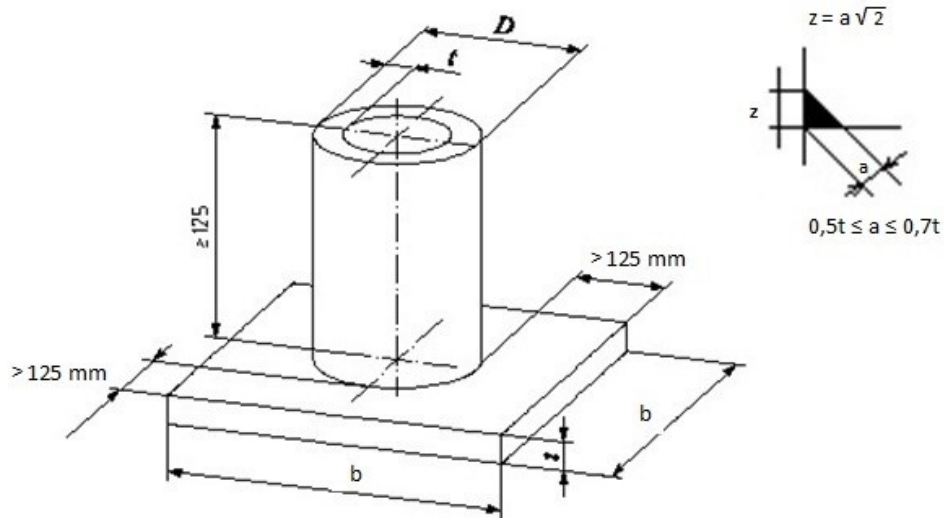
Sample dimensions for a full-penetration butt weld on pipes
